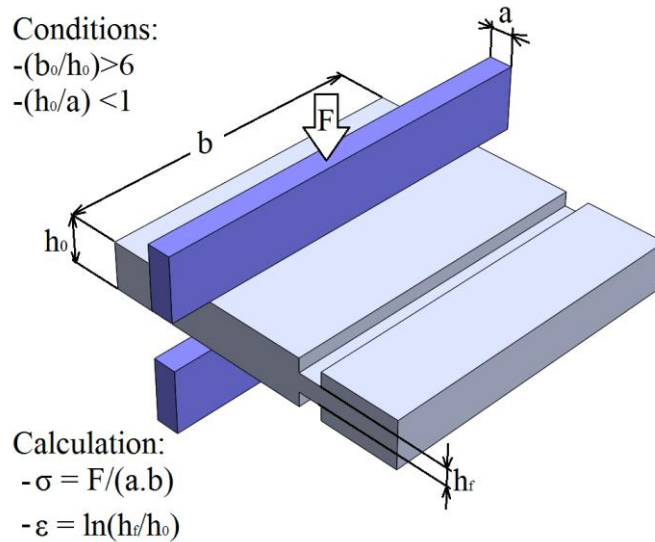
Drawing shows the plan strain upsetting test [8].
